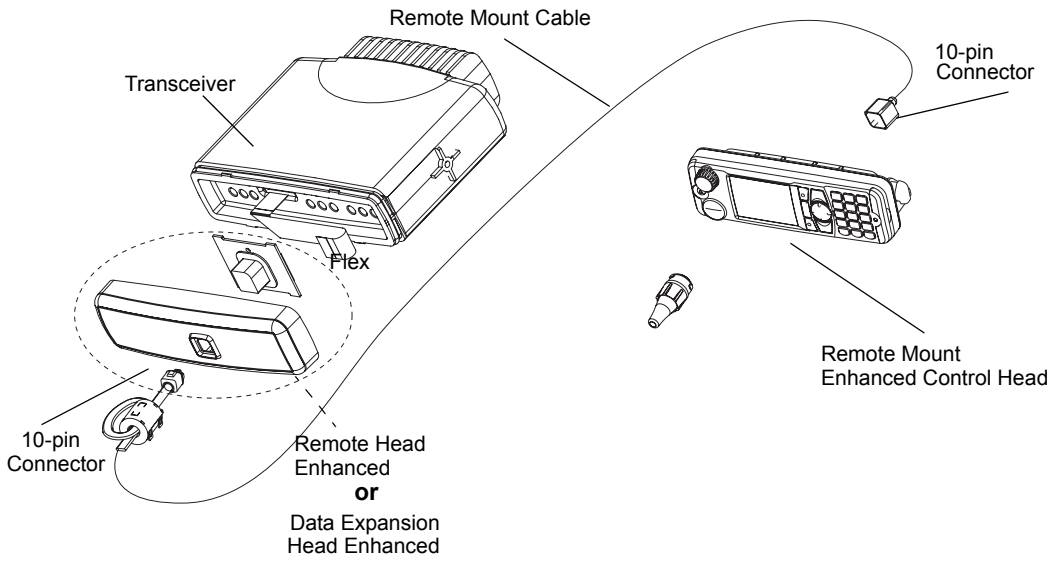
Remote Mount Enhanced Control Head - Exploded View
